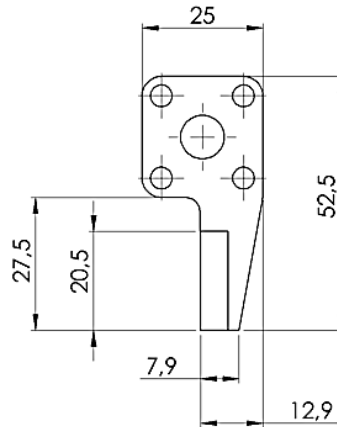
Geometry of the blade for multi-scale cutting velocity experiments; 1 mm thick, 20.5 mm of cutting edge, and 10° cutting wedge angle (dimensions in mm).
